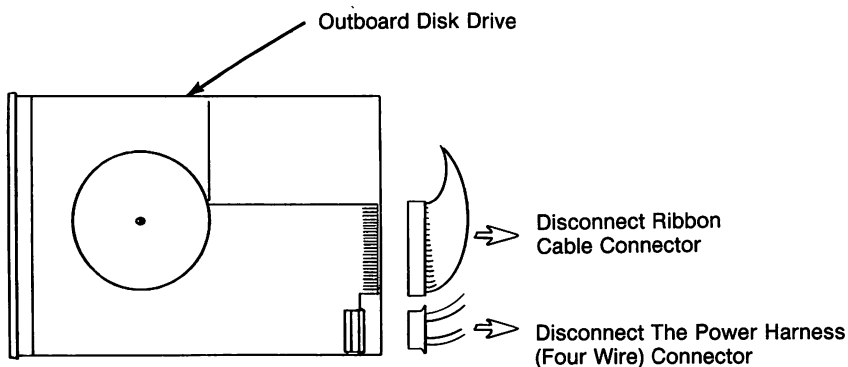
Right side view. Disconnecting outboard disk drive cables
